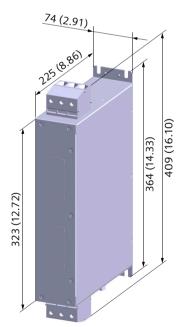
Dimension drawing of line filters for Smart Line Modules 36 kW and 55 kW, all dimensions in mm and (inch)
